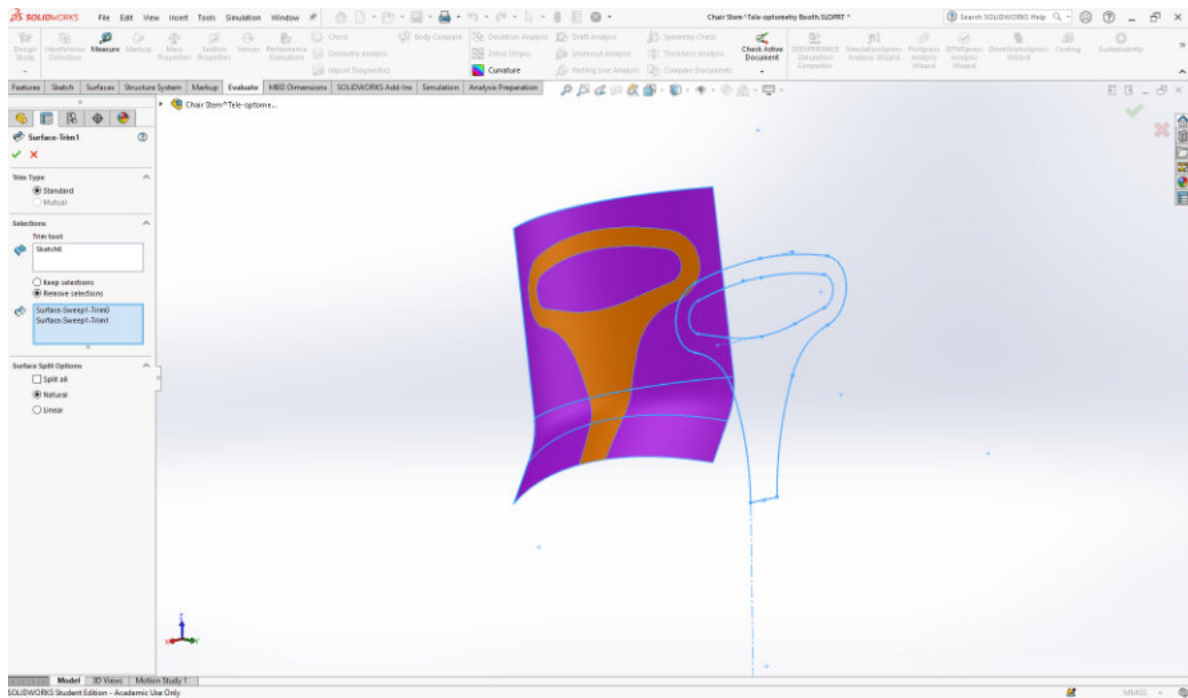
CAD Modeling Process Using Professor Frederic's Surface Trim Technique
